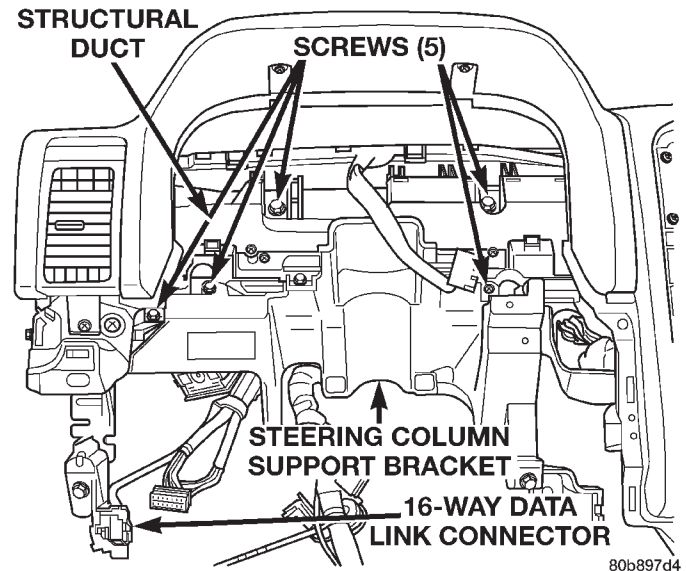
Instrument Panel Steering Column Support Bracket Remove/Install
